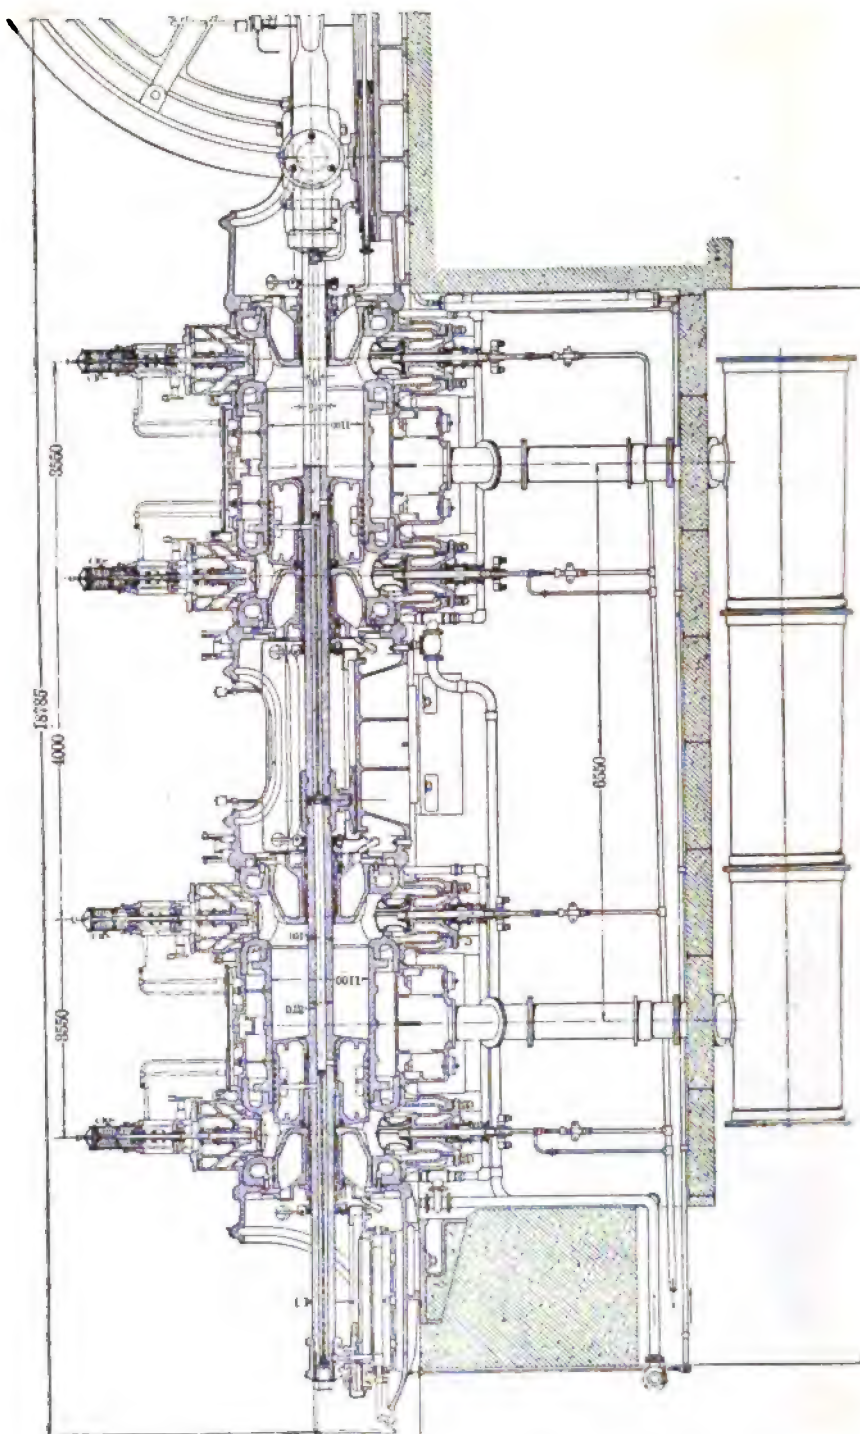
,000-H.P. GAS-ENGINE, BY THE GASMOTORENFABRIK DEUTZ.
